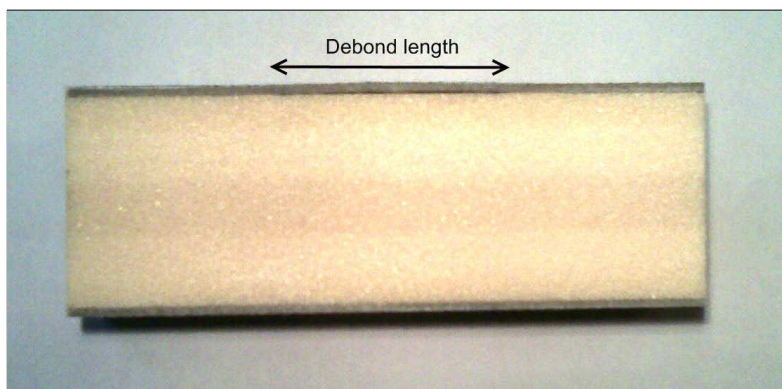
A column test specimen with H100 core and 38.1 mm debond.
